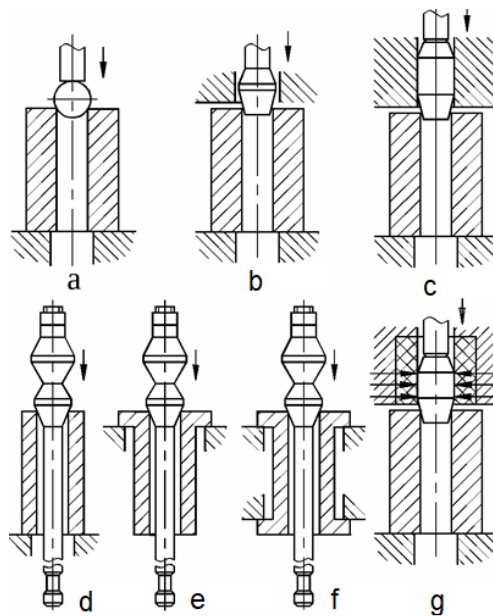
Schemes of plastic burnishing of holes [6, p. 67].
